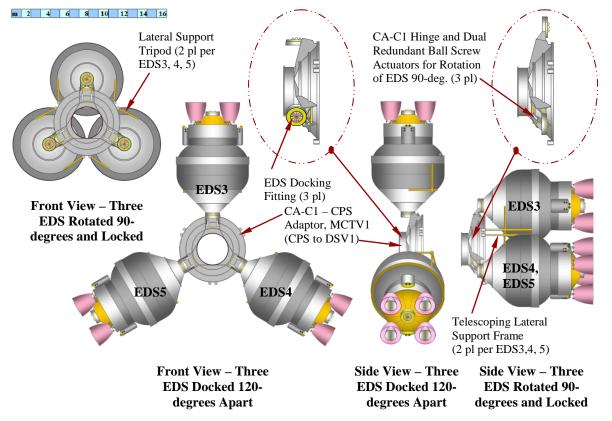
TMI Booster Assembly: EDS3, 4, and 5 Docked to CA-C1 Adaptor – Configuration 2-Views.
